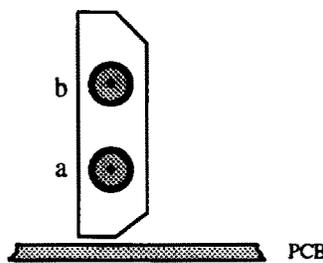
HS-SE cable pins/connectors wiring
